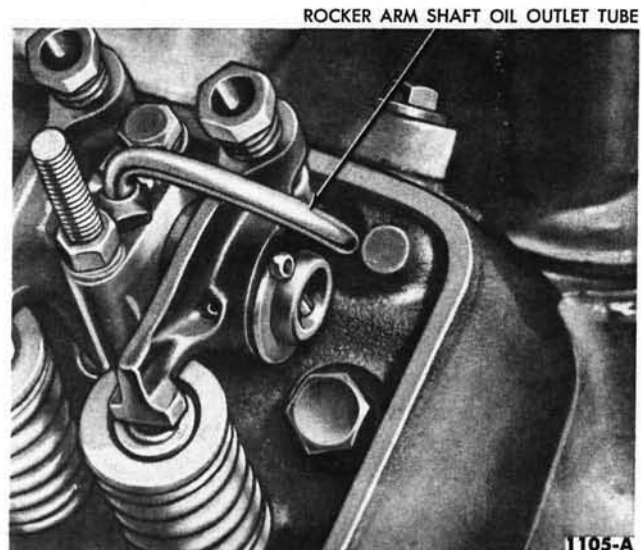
Valve Rocker Arm Shaft Oil Drain Tube Position
